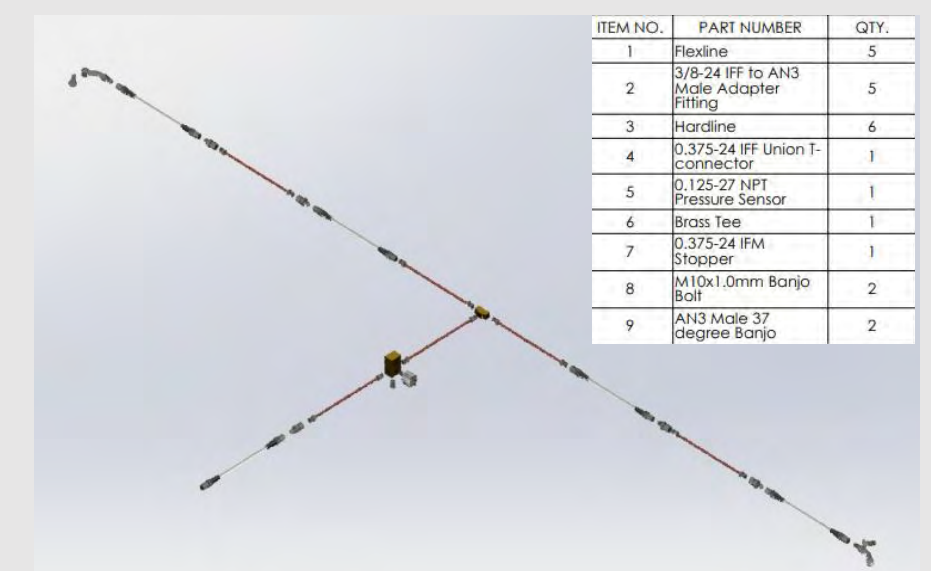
Flat Brake Line. Rogue consists of front and Rear independent brake lines.
